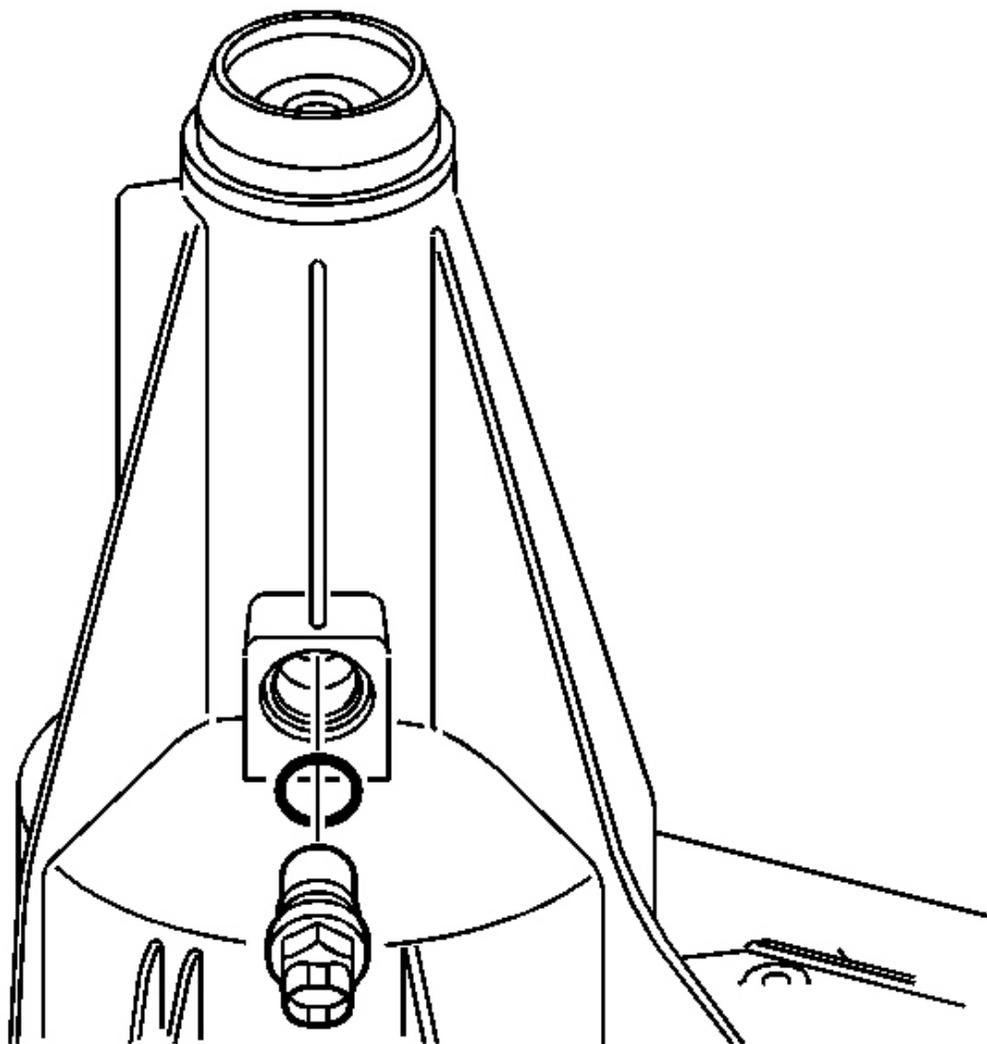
Identifying Vehicle Speed Sensor (VSS) & O-Ring Seal
